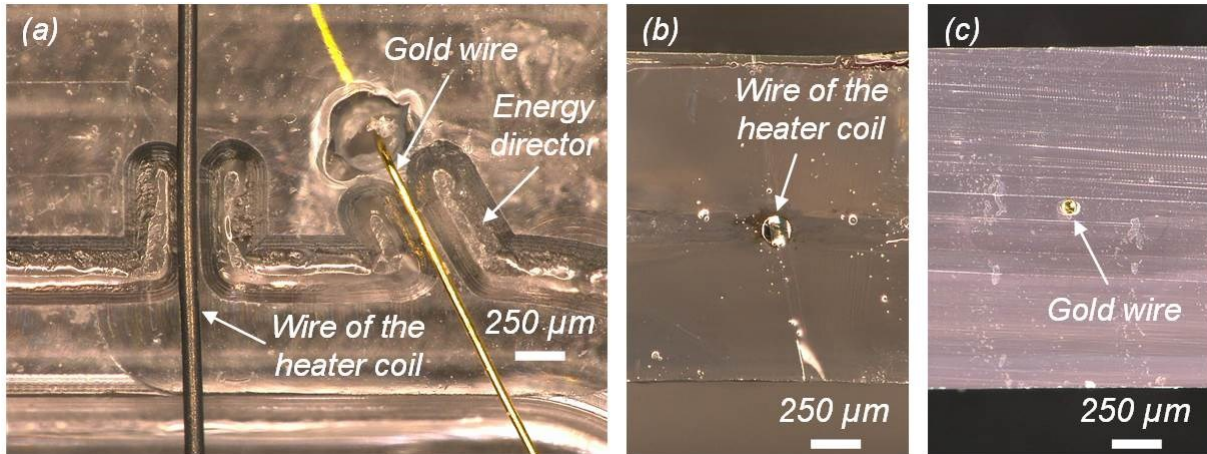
Top view (a) of specially shaped energy directors on the lower foil before ultrasonic welding, and cut through the wire of the heater coils (b) and a gold wire (c) after welding.
